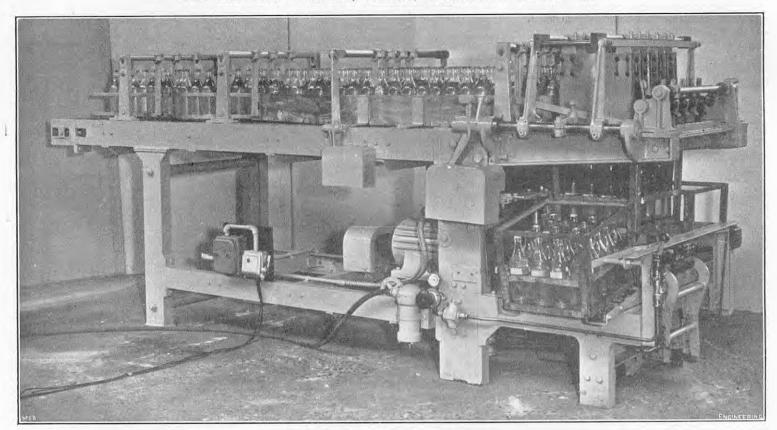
LEFT-HAND SIDE OF MACHINE.
